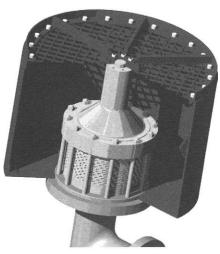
Cutaway view of cowling bolted to main body Courtesy of Copes-Vulcan, An SPX Process Equipment Operation
